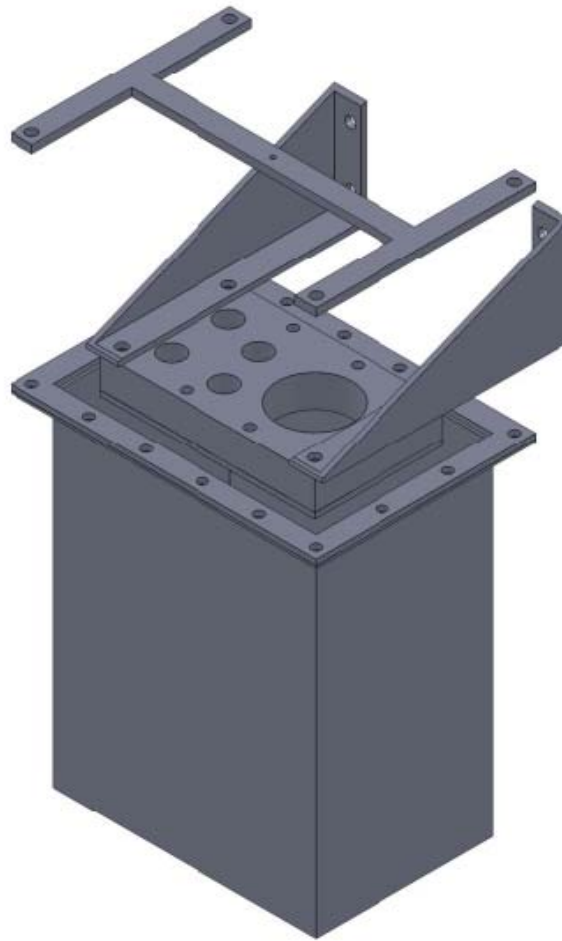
Isometric CAD Graphic of Gravimetric Fuel Measurement System Assembly
